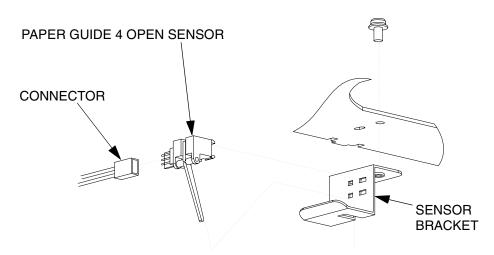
Removal of the Paper Guide 4 Open Sensor
